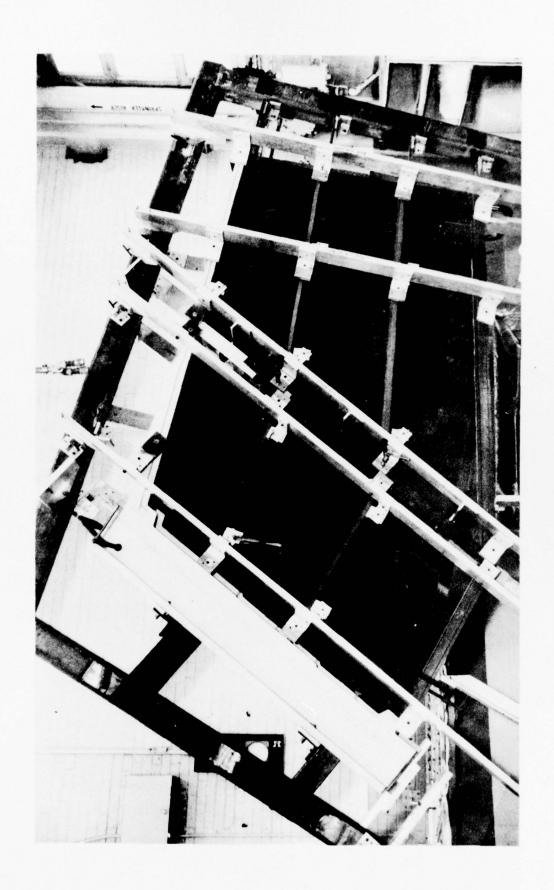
COMPOSITE WING BOX SUBSTRUCTURE ASSEMBLY
